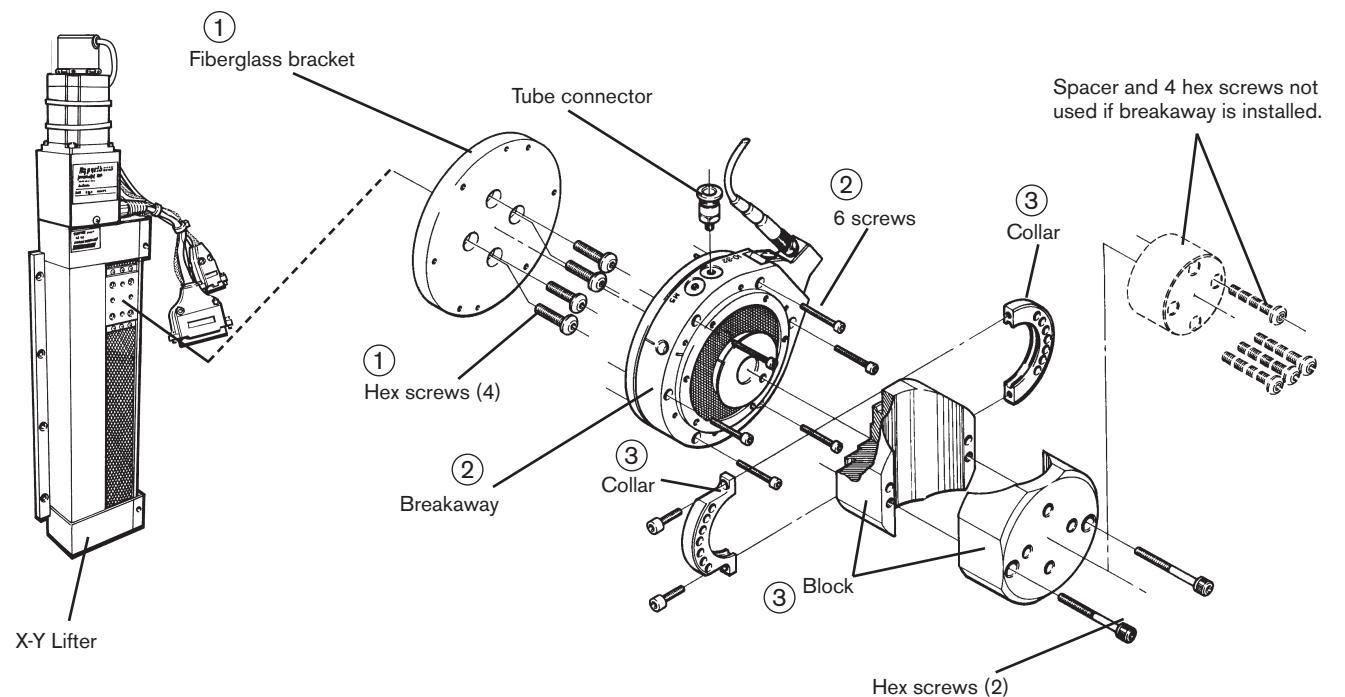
X-Y lifter assembly optional torch breakaway kit mounting details
